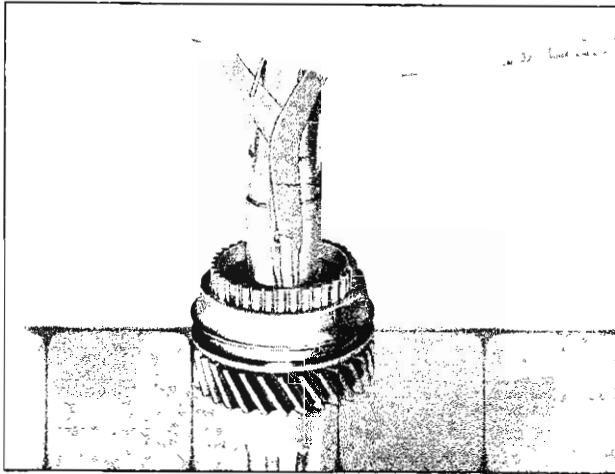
M—Removing 1-2 Speed Synchronizer Clutch Assembly Retainer Snap Ring
